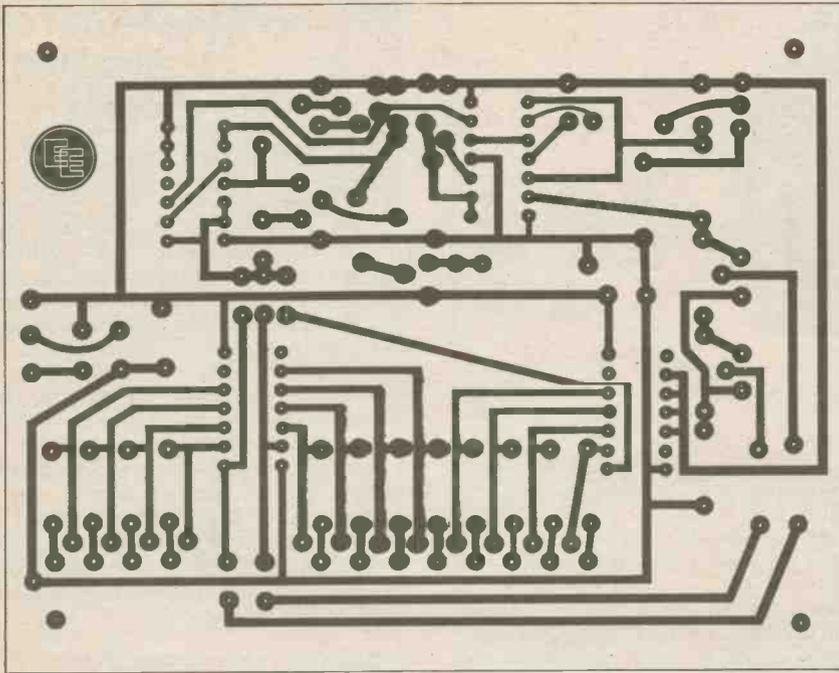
Printed circuit board assembly and track layout of the main unit (shown actual size).
